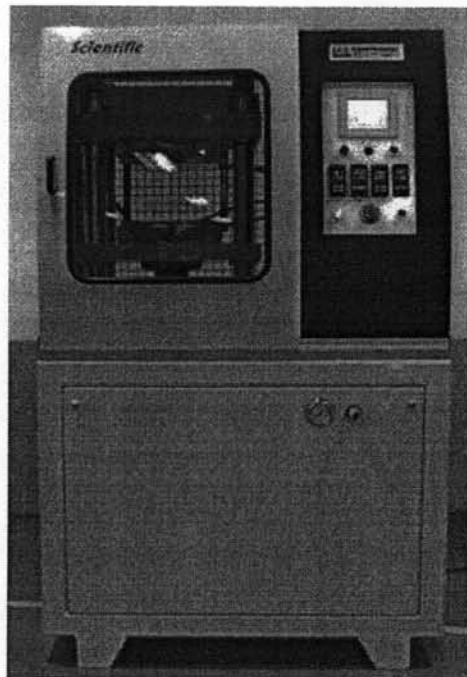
Compression molding machine(LABTECH model LP-S-50)
